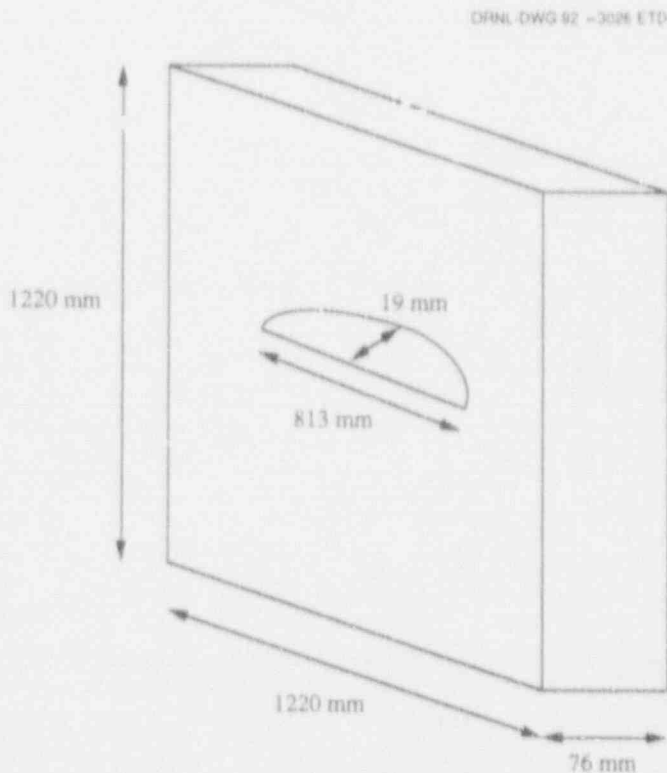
Schematic of candidate large-scale biaxial fracture specimen. The plate specimen is 76 mm (3 in.) thick with planar dimensions measuring 1220 by 1220 mm (48 by 48 in.). The flaw geometry is an elongated elliptical surface flaw with length of 813 mm (32 in.) and a maximum flaw depth of 19 mm (0.75 in.).
